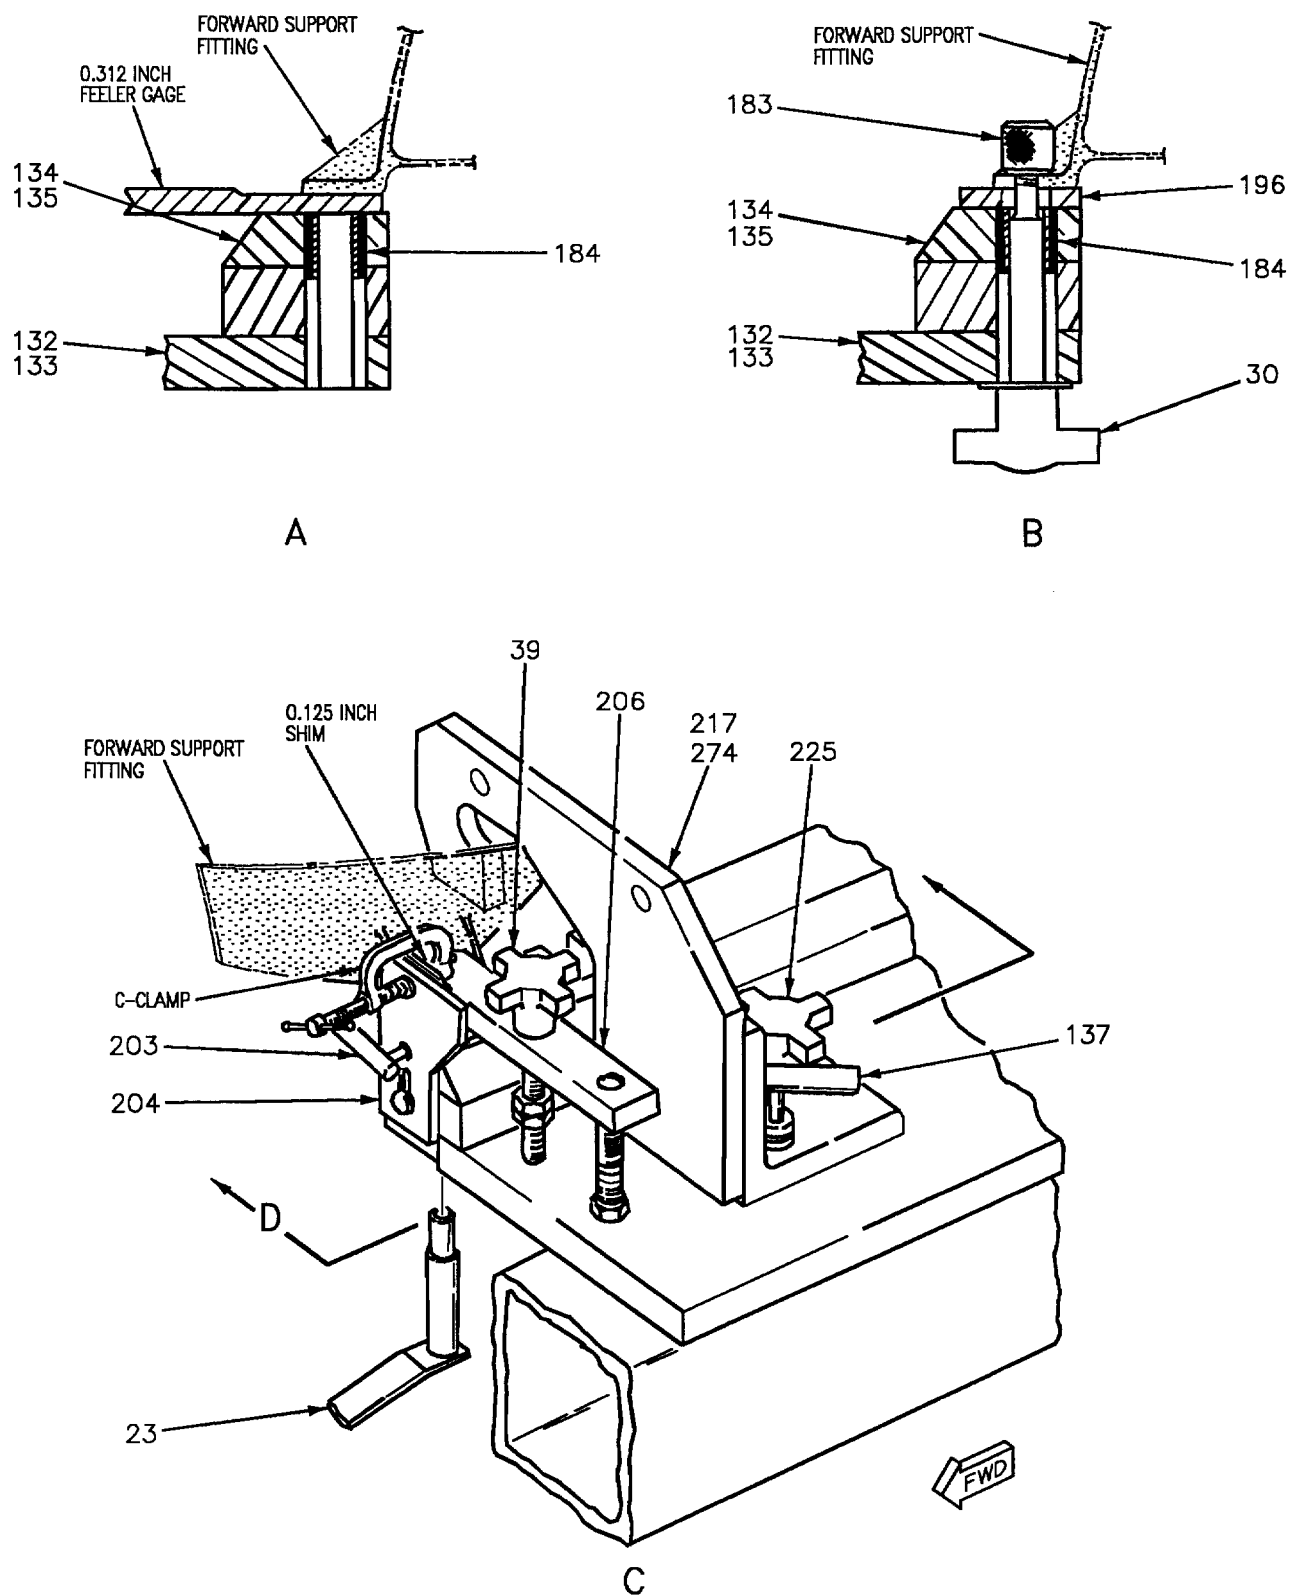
Inspection or Replacement - Forward Support Fitting (Sheet 2)
